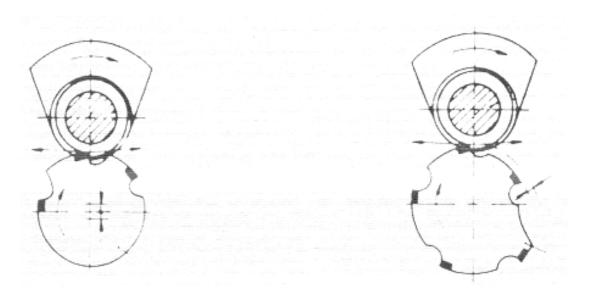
Rotary Turn Broaching. (Spiral Turn Tool)
